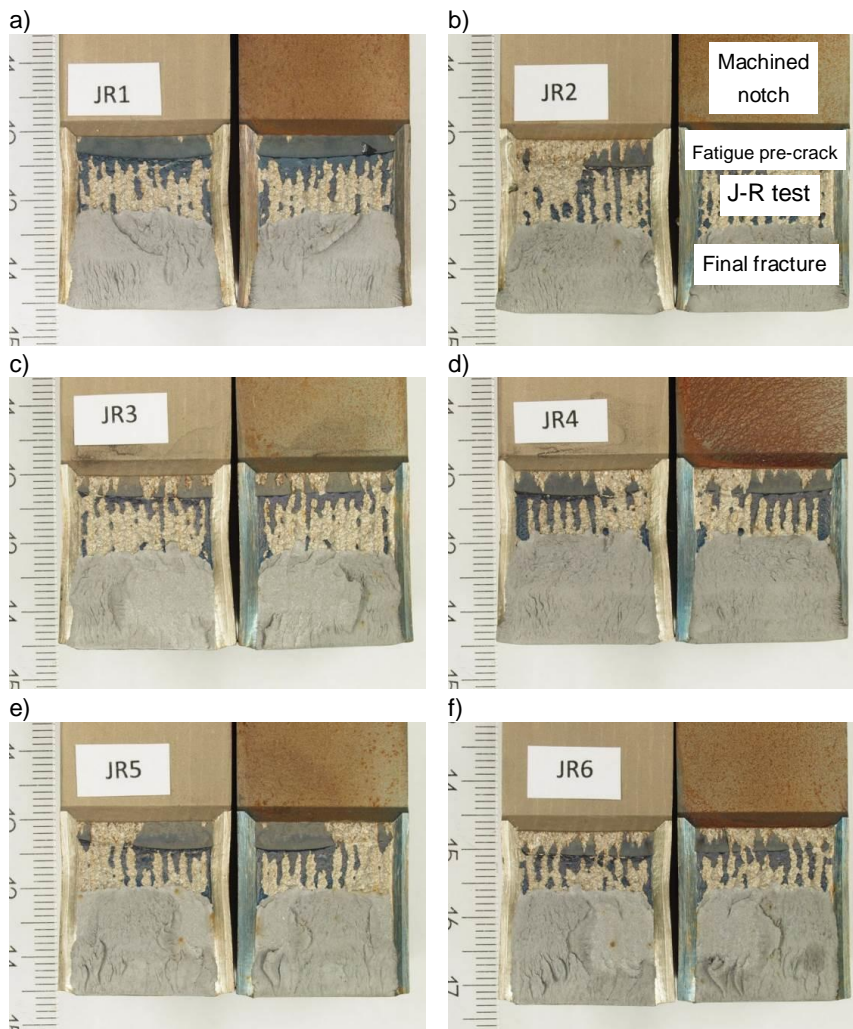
Photographs of fracture surfaces of the J-R test specimens JR1-JR6, as-received condition and T-L orientation, from a) to f), respectively. The different regions of the fracture surface are marked in b), illustrating the specimen JR2, and they exhibit the same pattern for each specimen.
